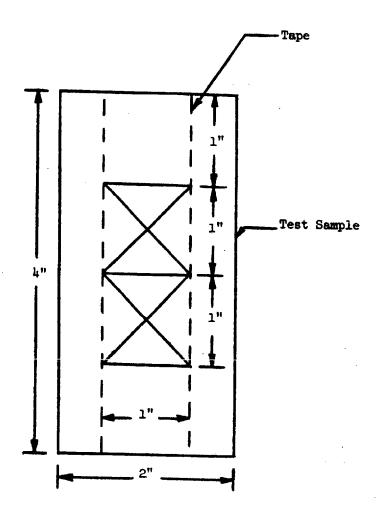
Showing "x" and horizontal cuts for adhesion of coating test
